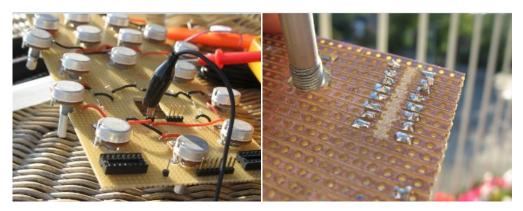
BACK AND FRONT SIDE OF THE STRIPBOARD
